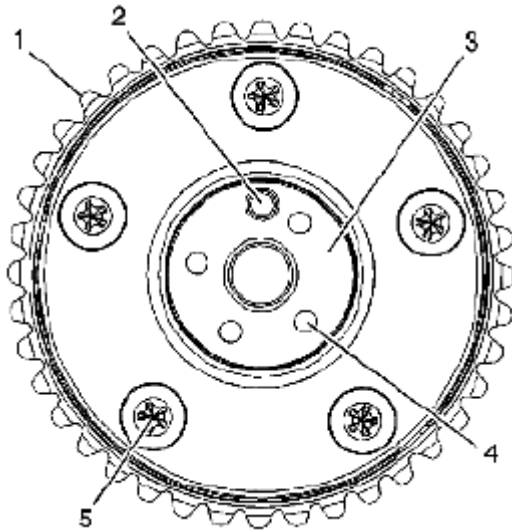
Inspecting Back Of Right Intake Camshaft Position Actuators
